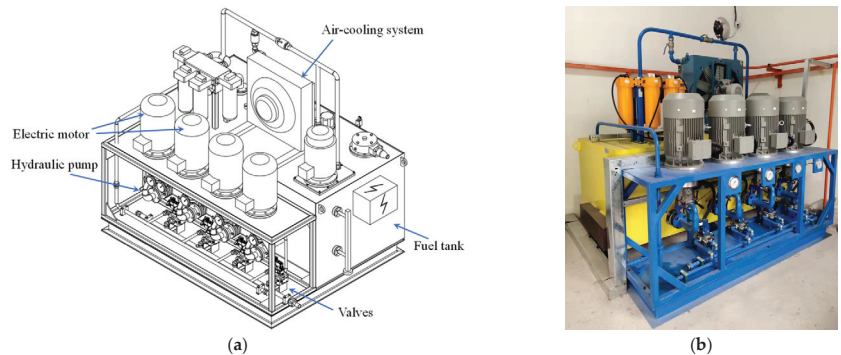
The hydraulic power units: (a) schematic illustration and (b) constructed assembly.
